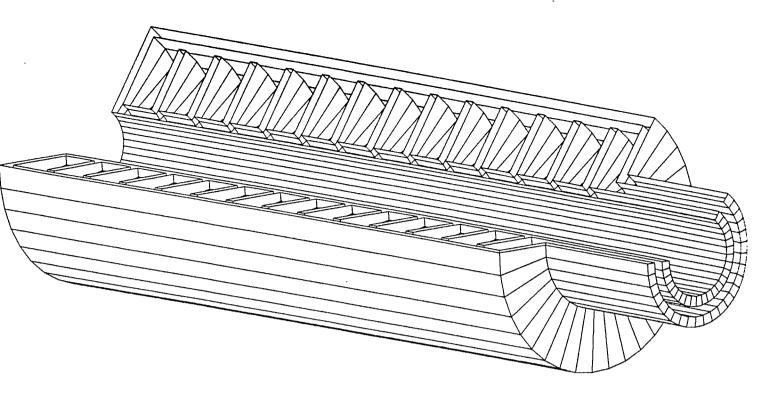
3-D CUTAWAY VIEW OF FINAL TUNER DESIGN
